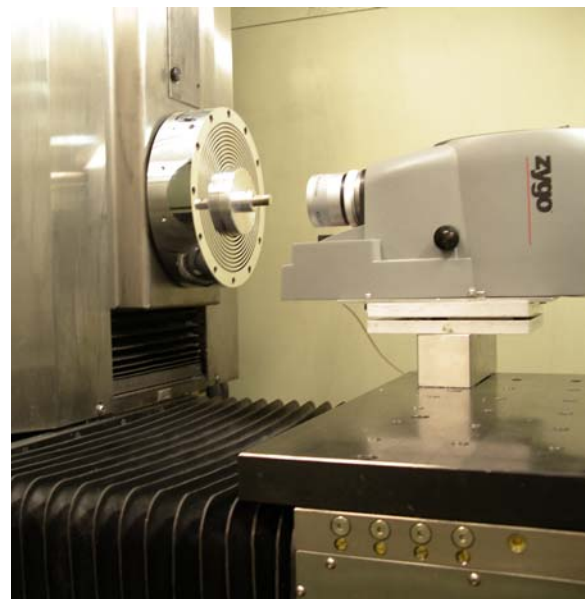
The interferometer (right) is shown mounted in the diamond turning machine on the Z axis. The spindle axis, holding the workpiece to be measured, is mounted in the Y axis which is stacked on the X axis of the machine tool.
